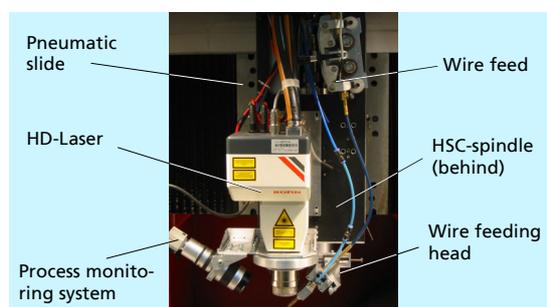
CMB machine tool: High Power Diode Laser and wire feeding system
